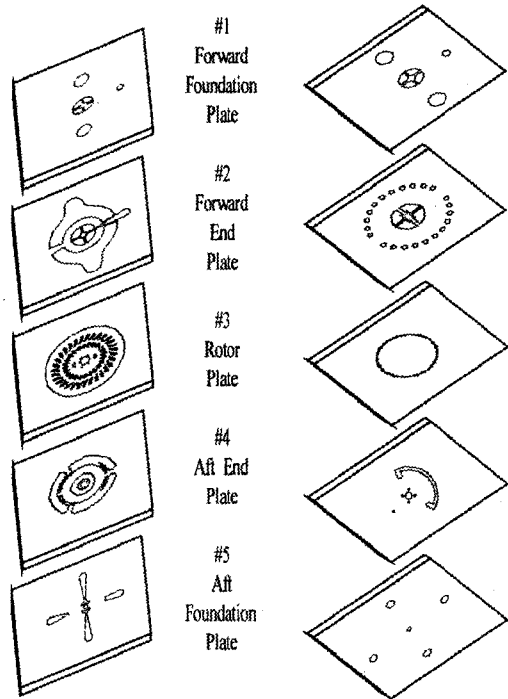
Top and bottom view of the five-stack device. The die is 15 mm per side and 2.5 mm thick.
